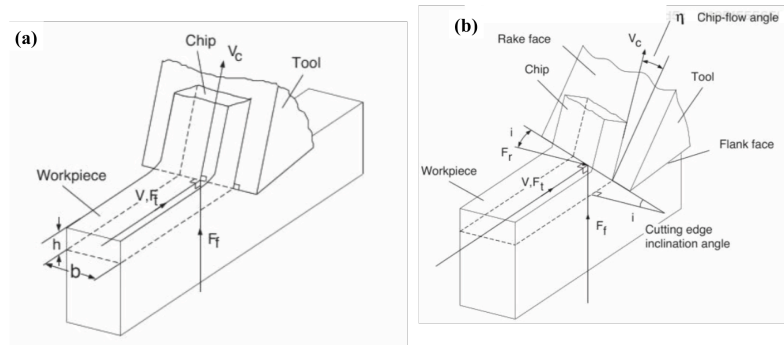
(a) Orthogonal cutting and (b) Oblique cutting geometry[6]
